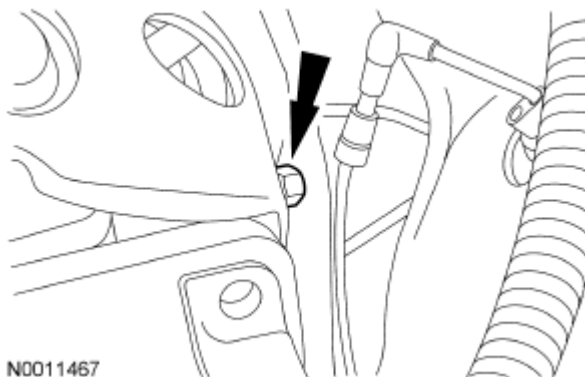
Locating Intake Manifold Crash Bracket Stud Bolt
